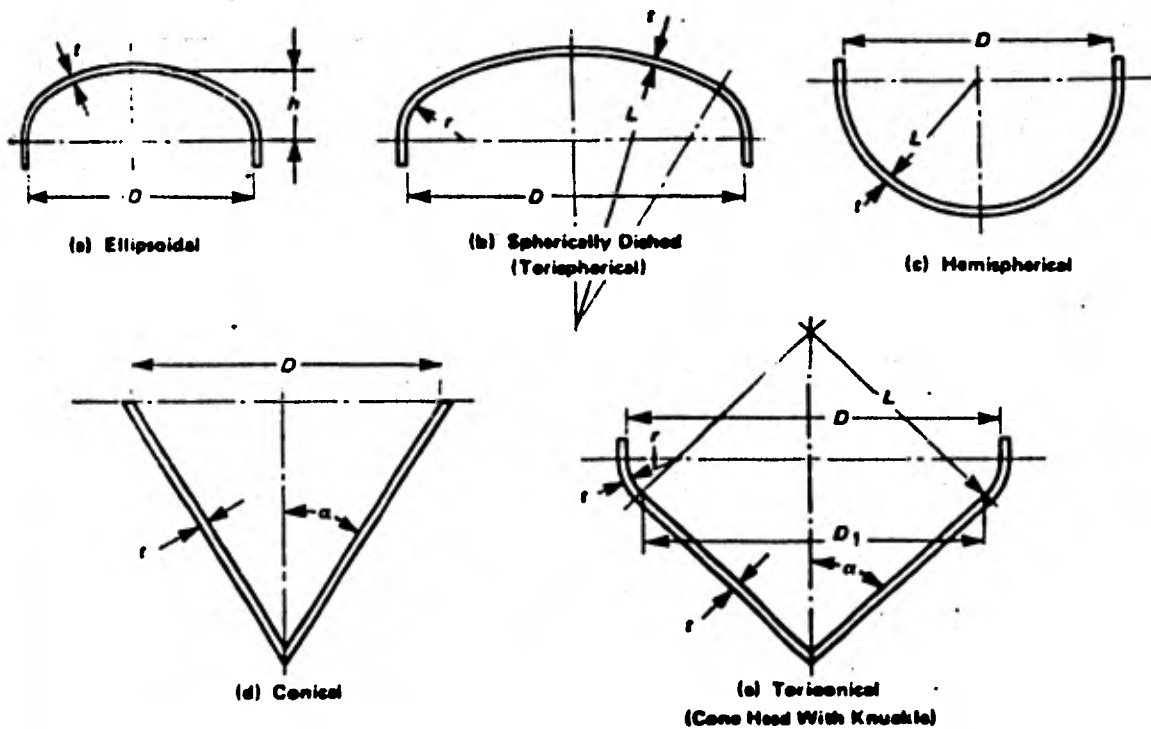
PRINCIPAL DIMENSIONS OF TYPICAL HEADS
